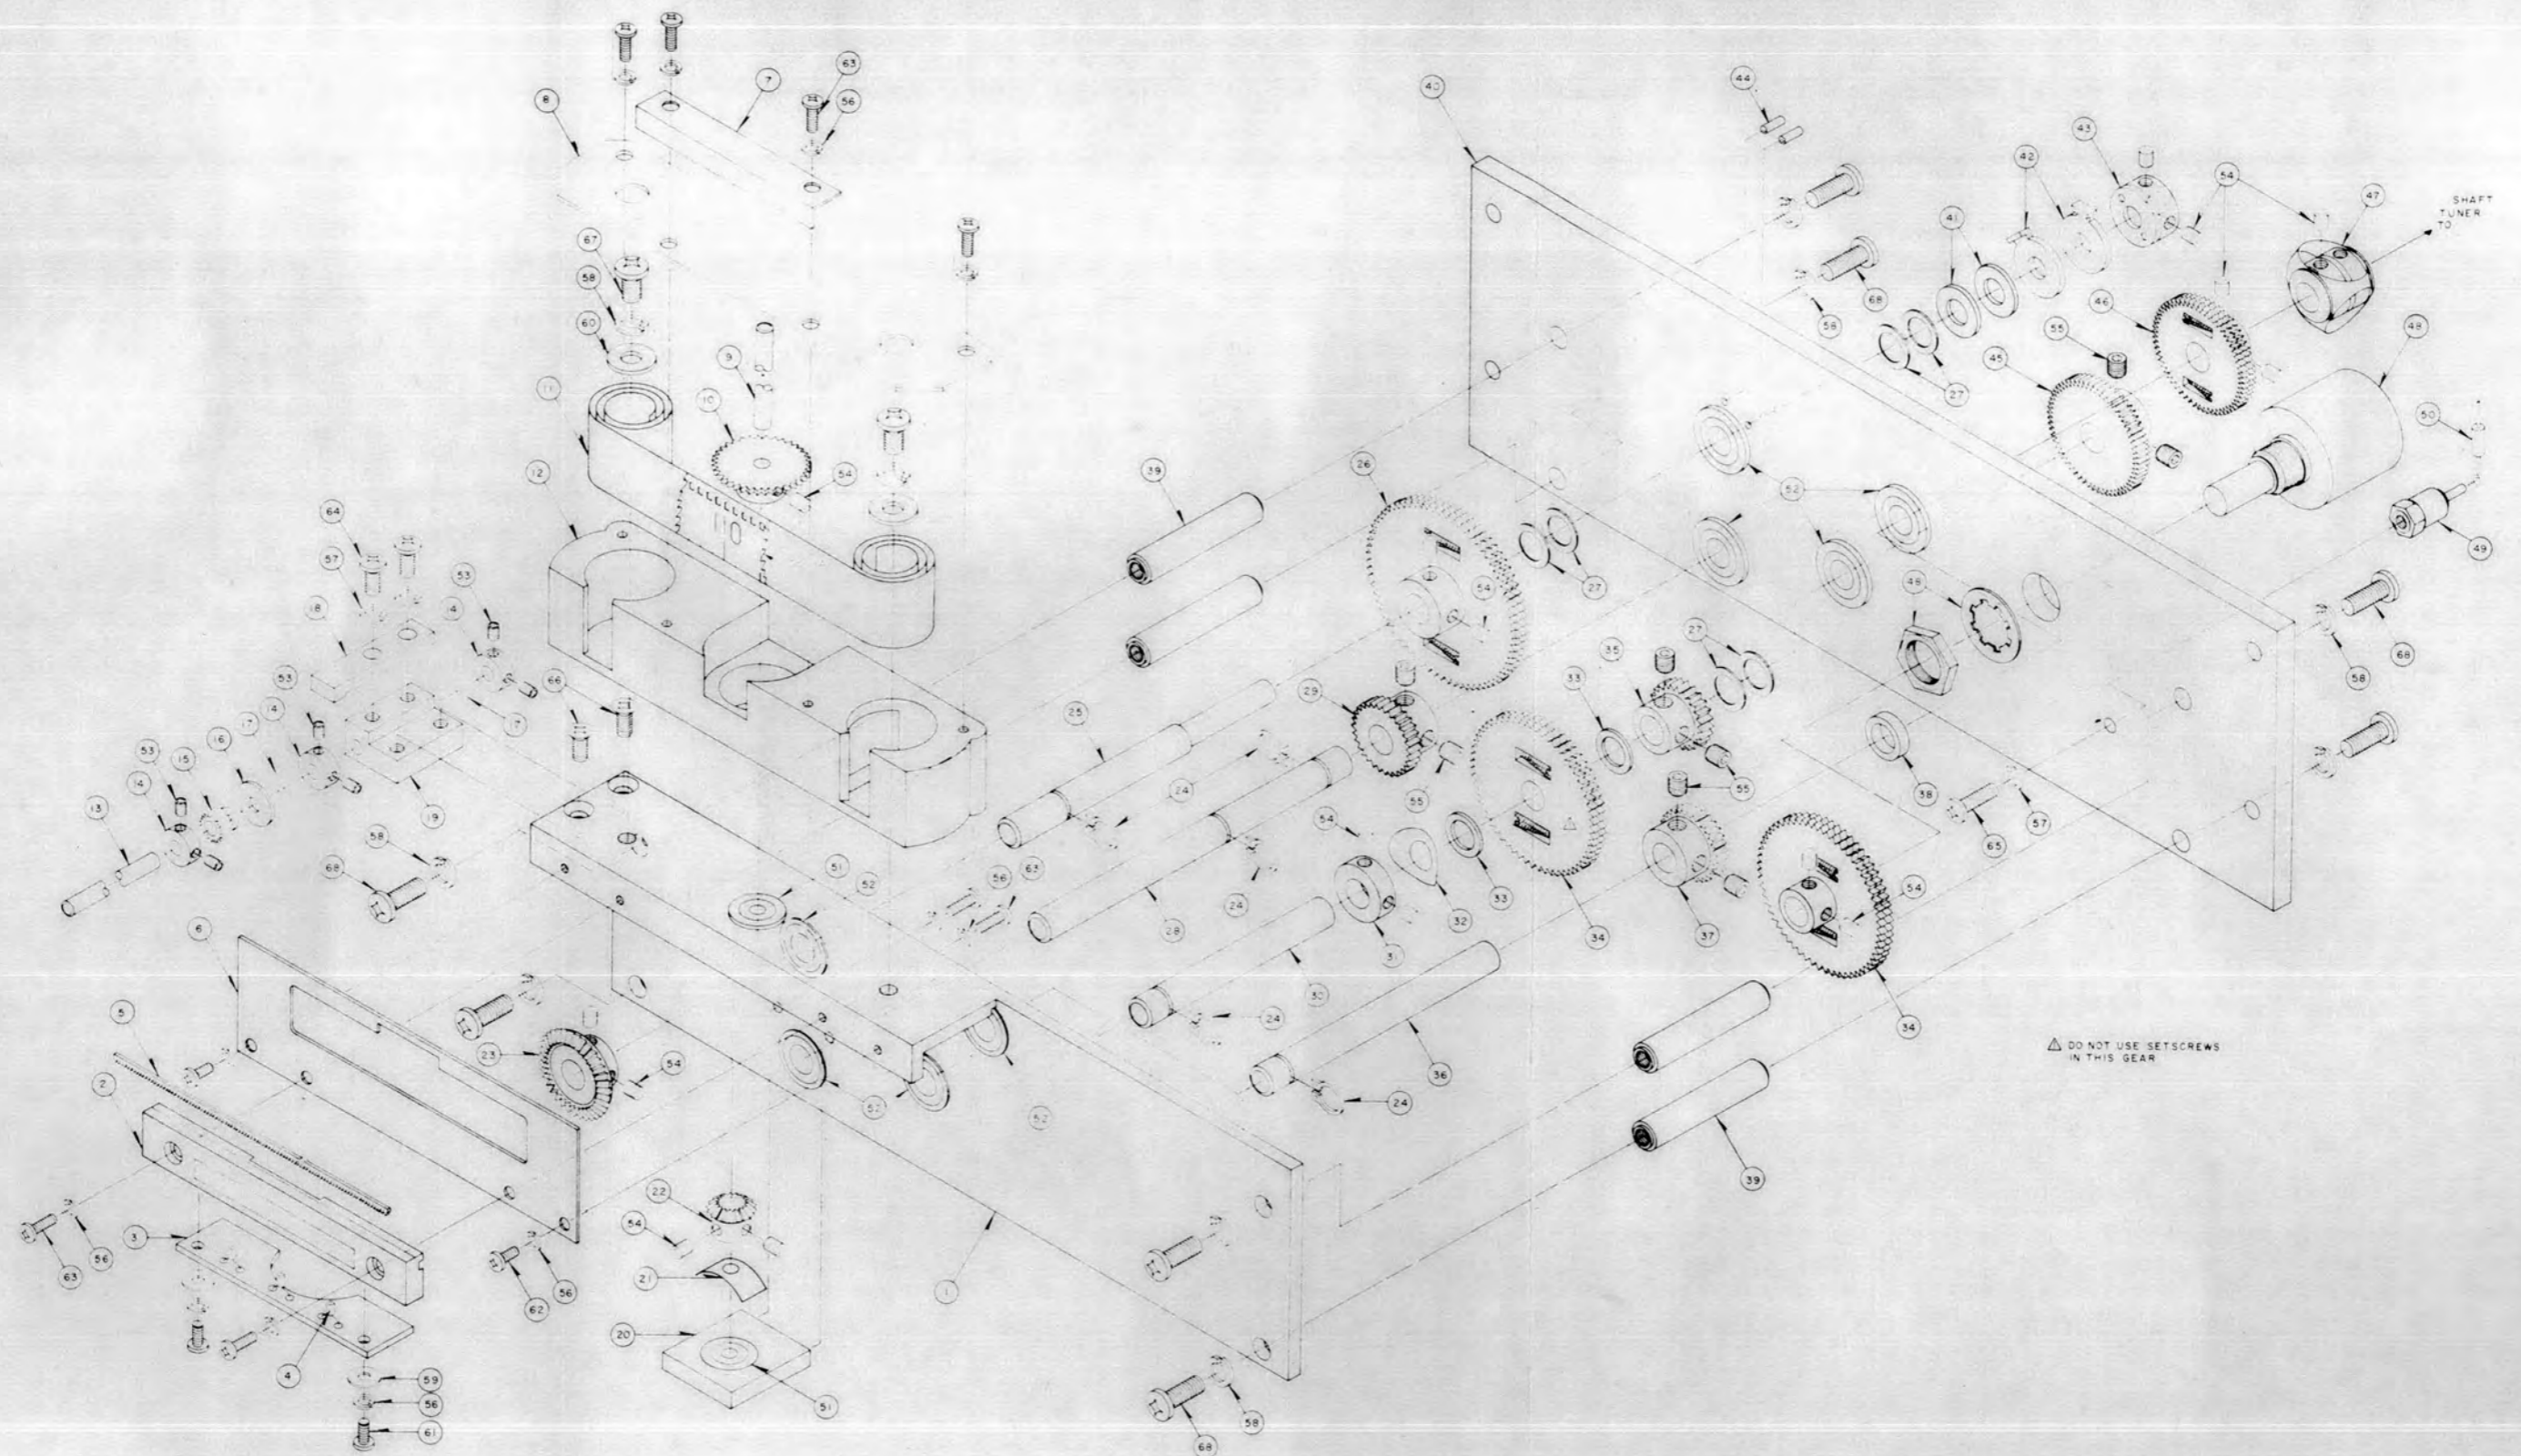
Type 85115 Tuning Drive, Exploded View (A4), Location of Components
